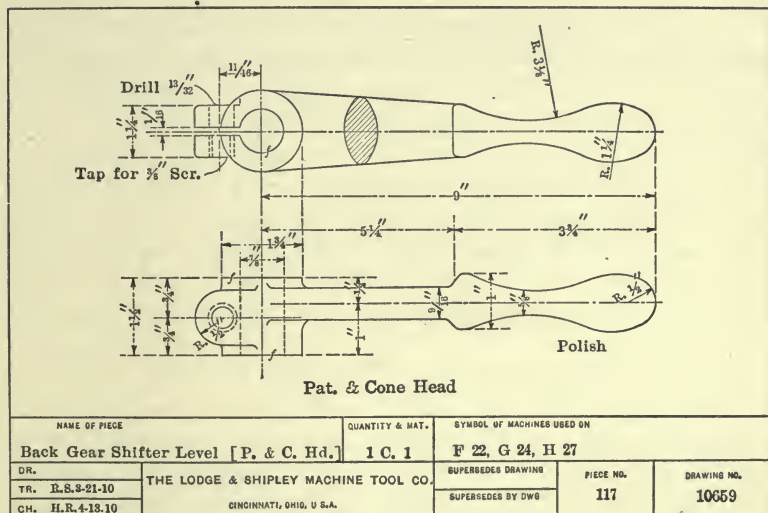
Shop blue-print gummed to inside cover of traveler. Approximately 6×8 in.
